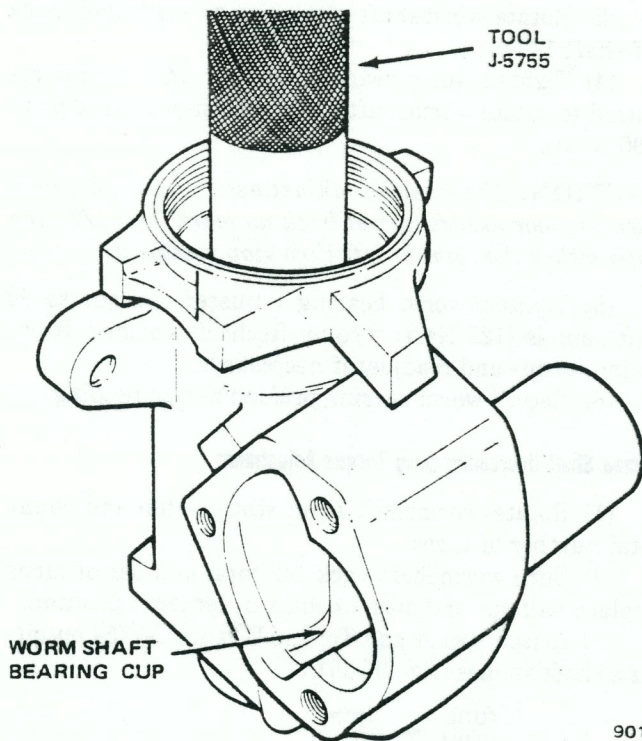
K-14 Installing Wormshaft Upper Bearing Cup
